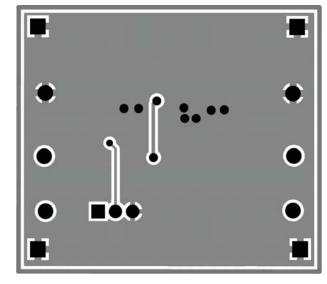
AAT4687 Evaluation Board Solder Side Layout.
